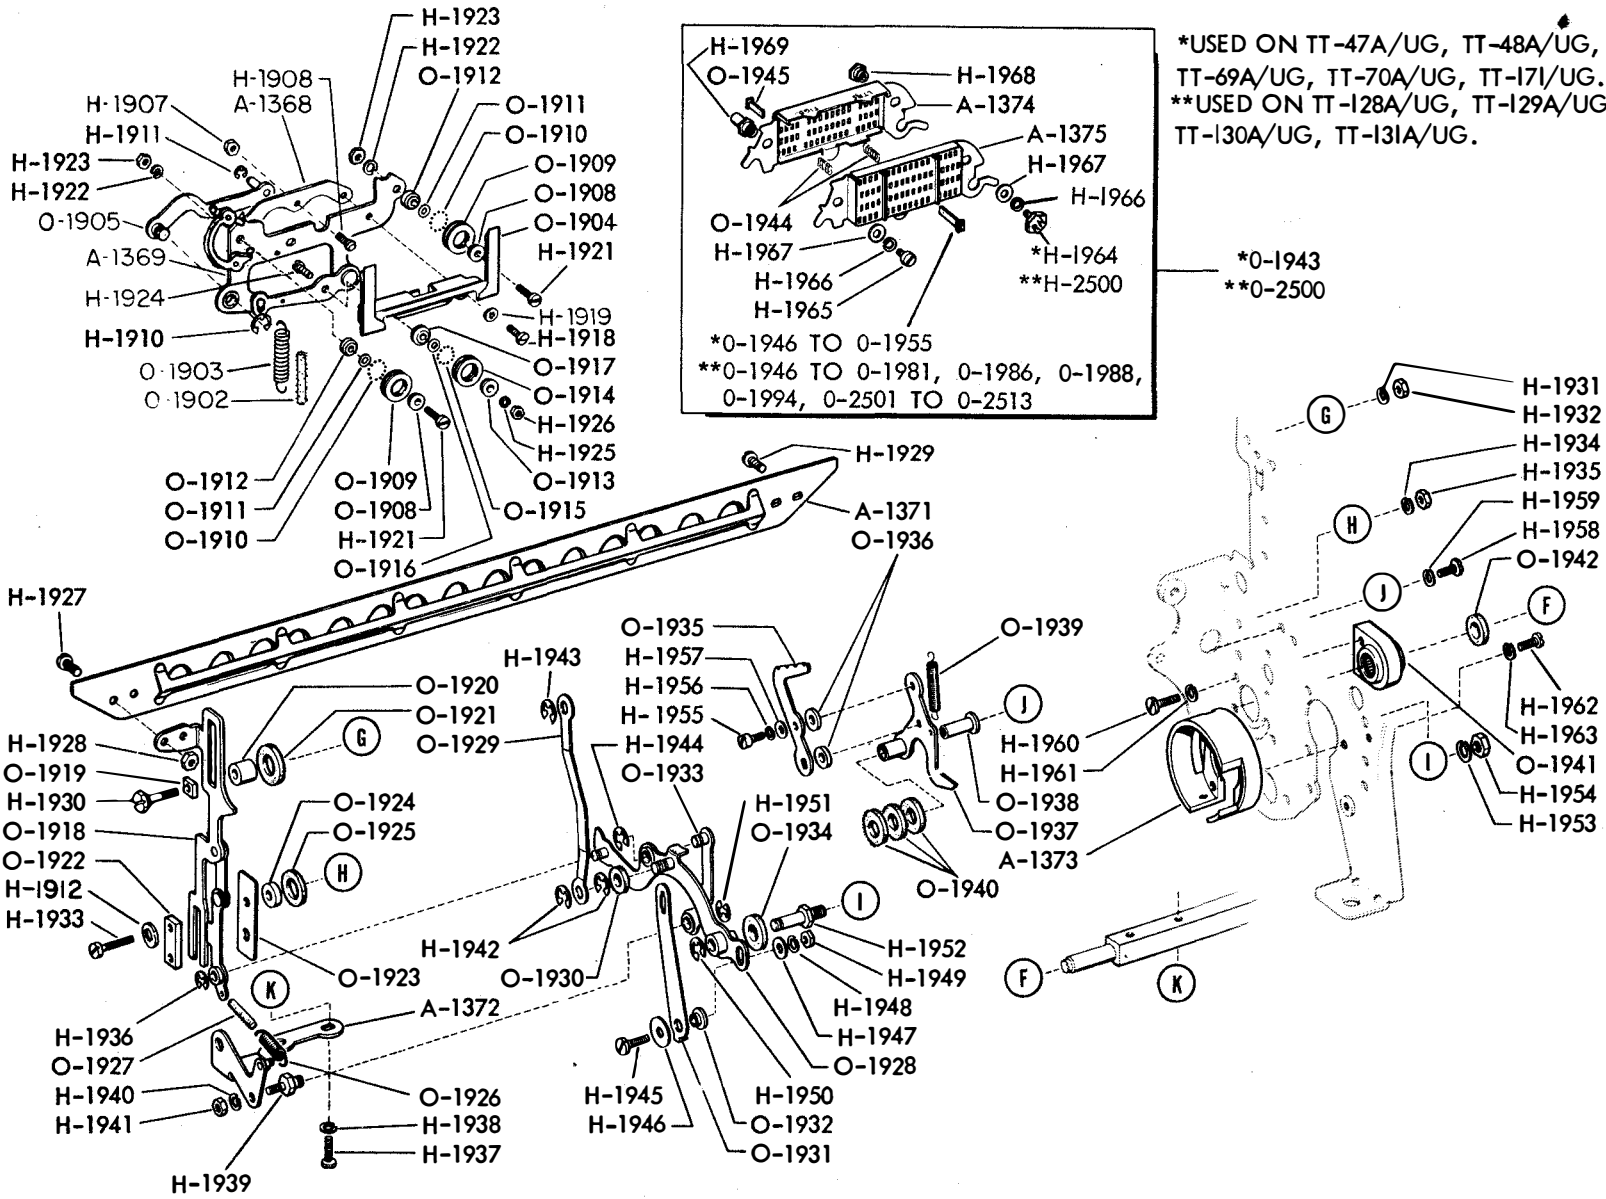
A. Automatic Typewriter, Old Style Type Box Parts
